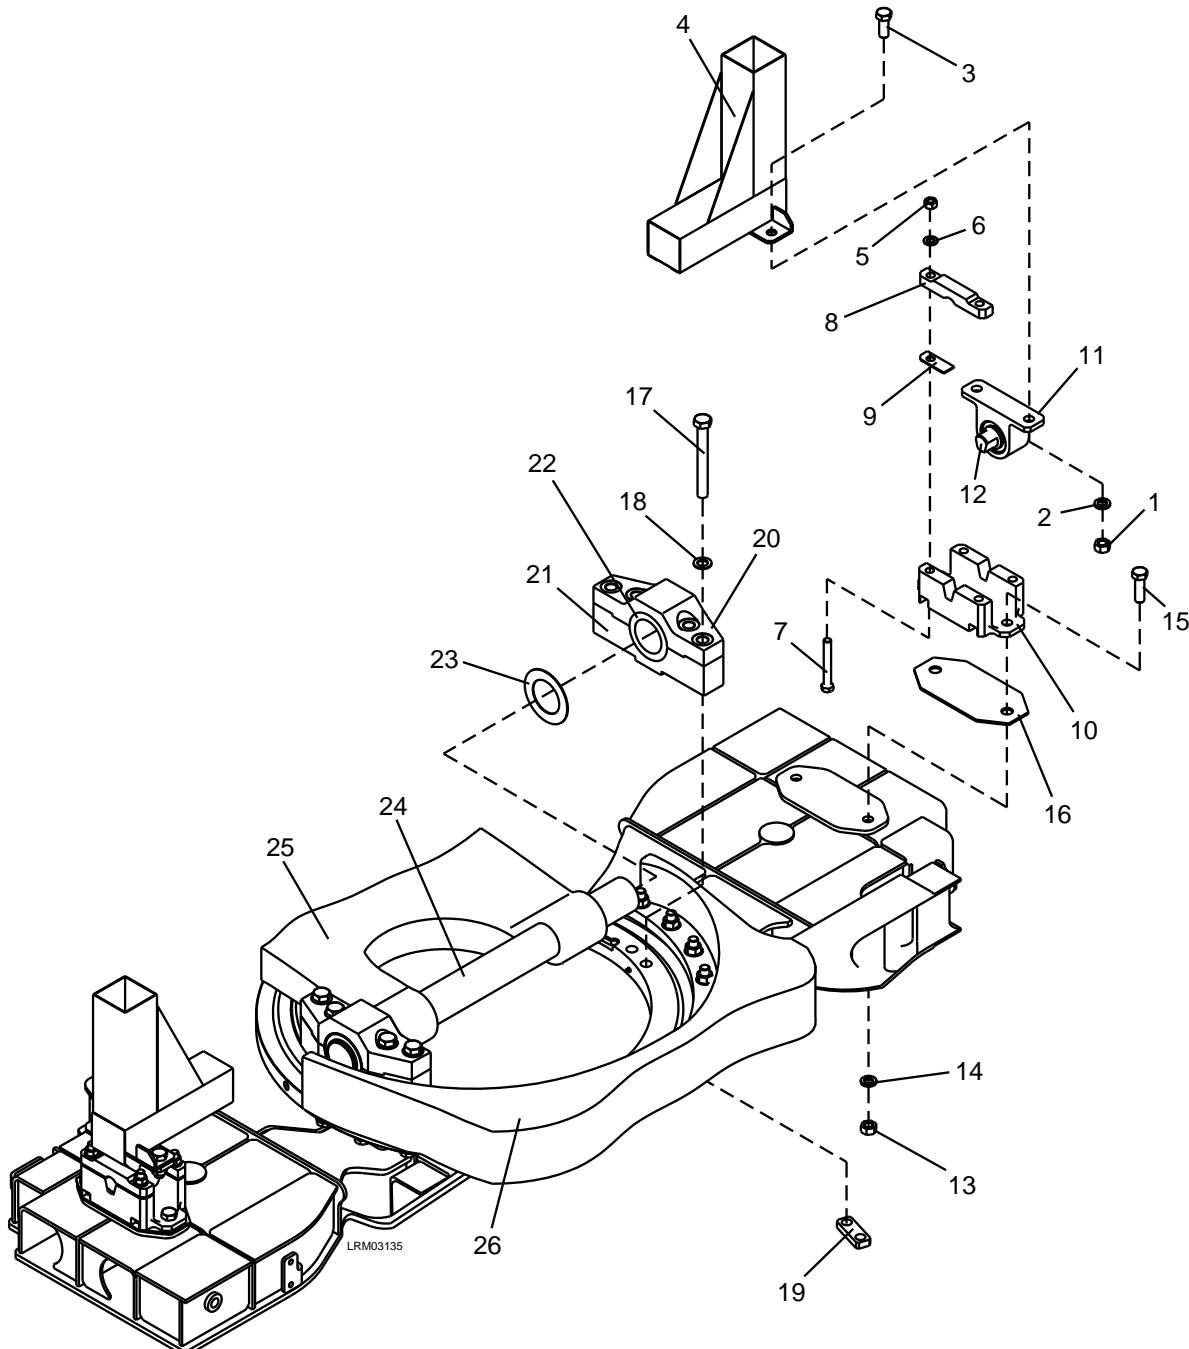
Articulation Middle Frame and Pivot Bearing Assembly
